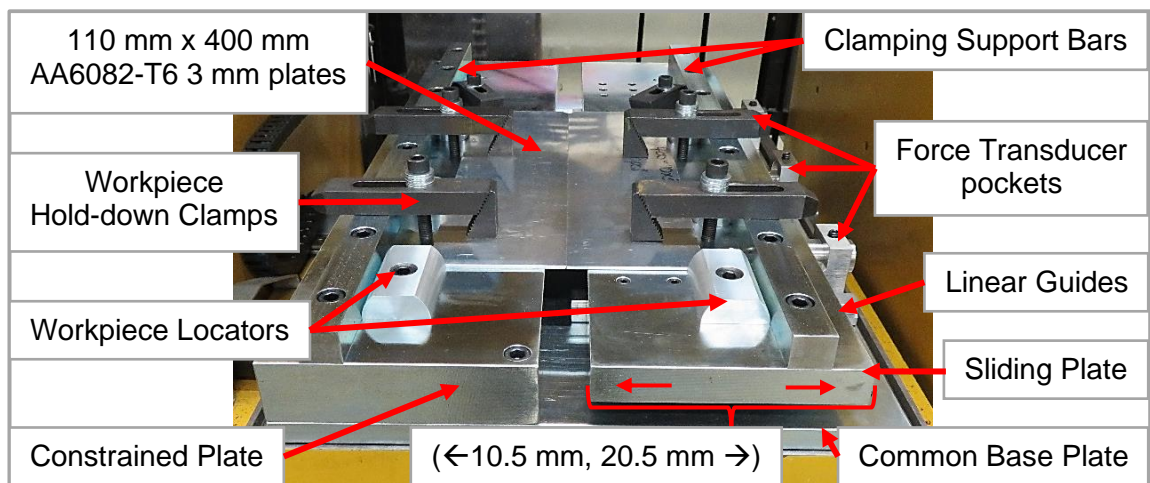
Bobbin FSW Fixture workpiece hold-down clamps
